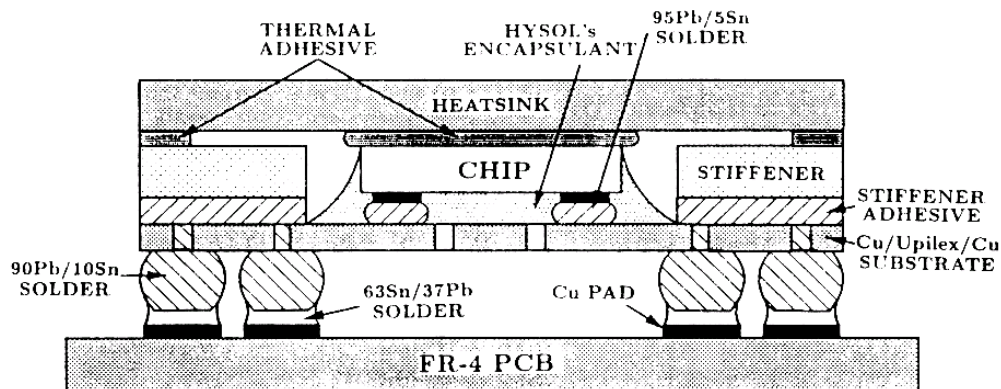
IBM Area Array Solder Bumped Flip Chip TBGA
